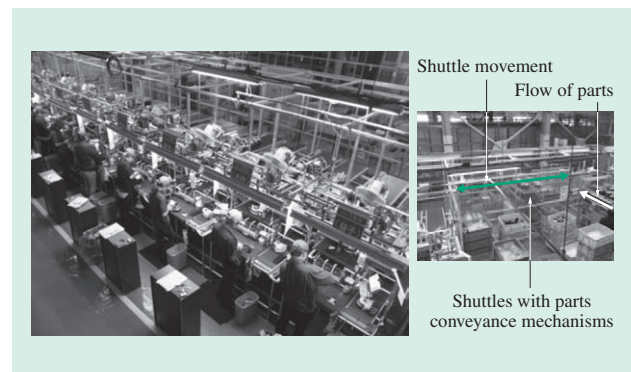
Vacuum Cleaner Chassis Assembly Cell.
